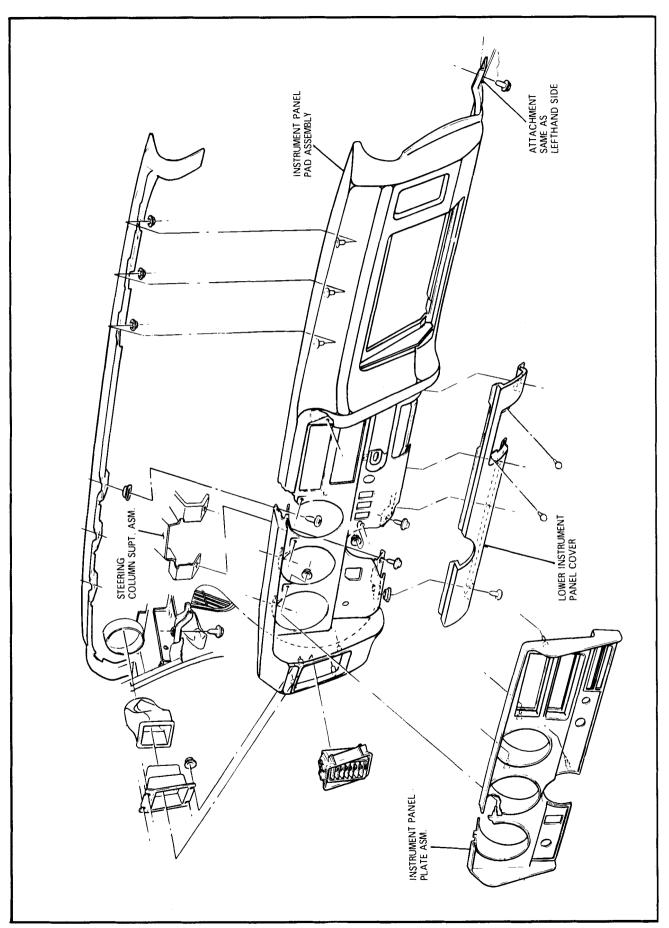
B Series Instrument Panel Pad Attaching Parts
